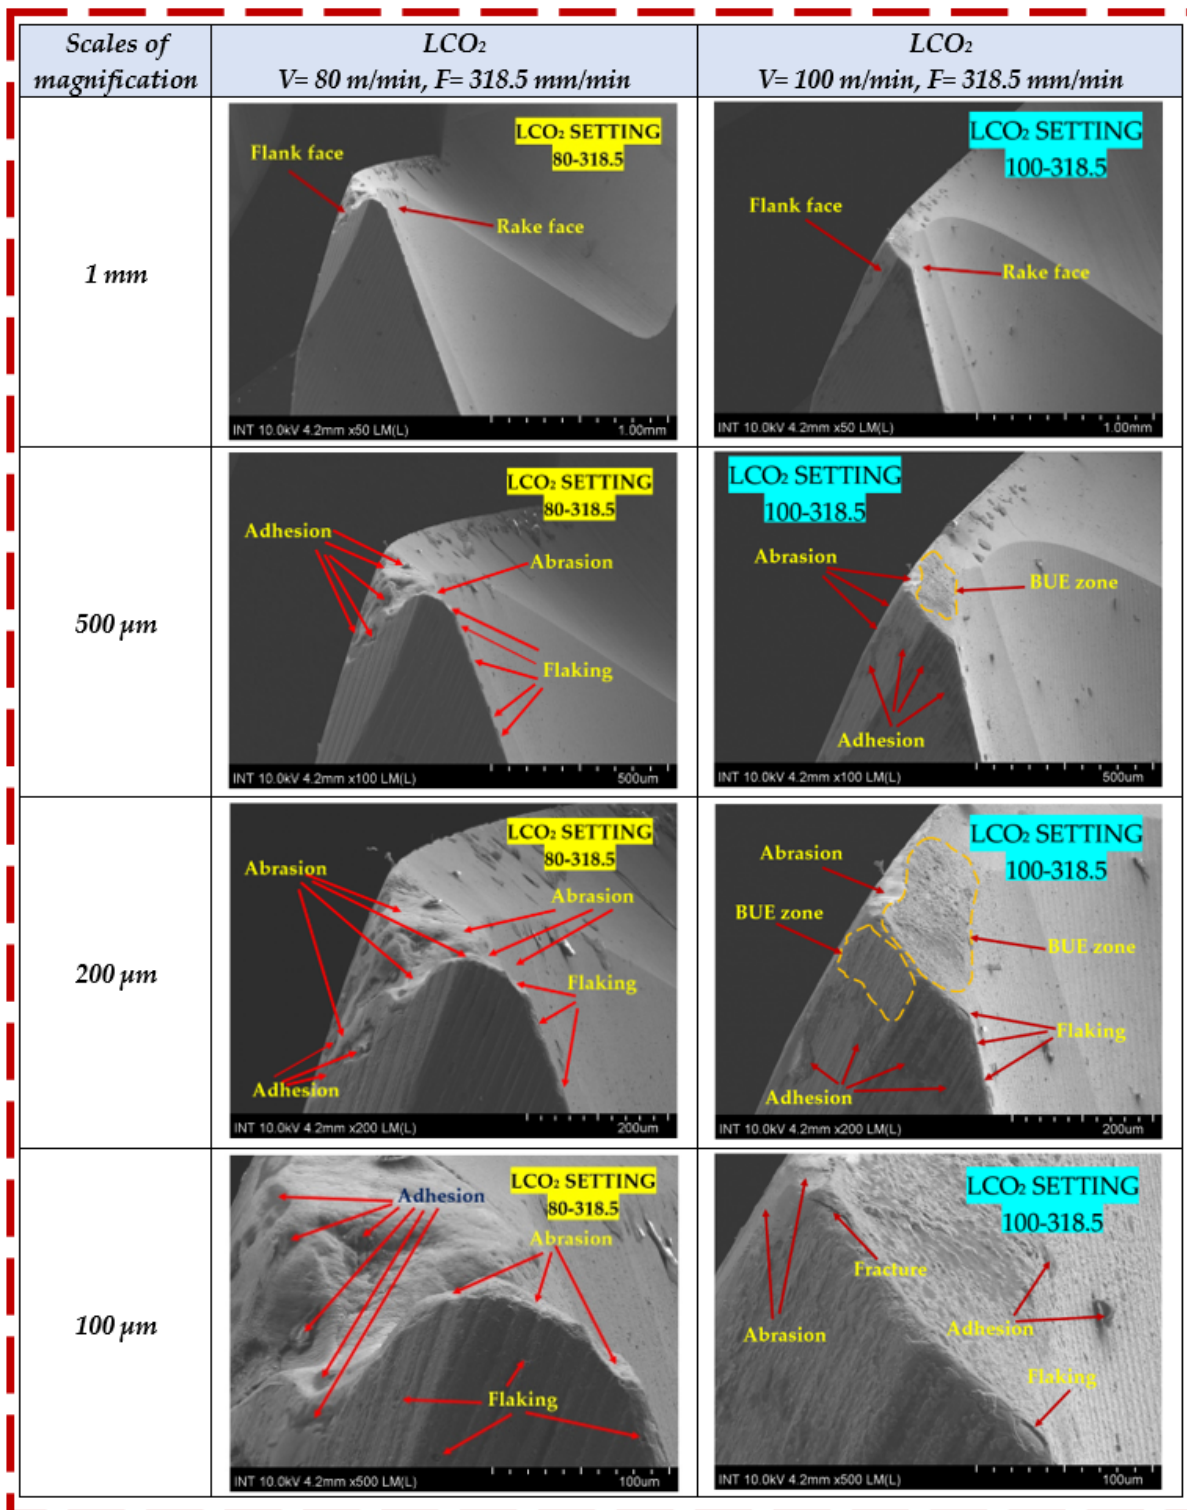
Variations in flank wear and rake wear under LCO₂ machining settings at cuttings speed ranging from 80 m/min to 100 m/min and a constant cutting feed of 318.5 mm/min.
